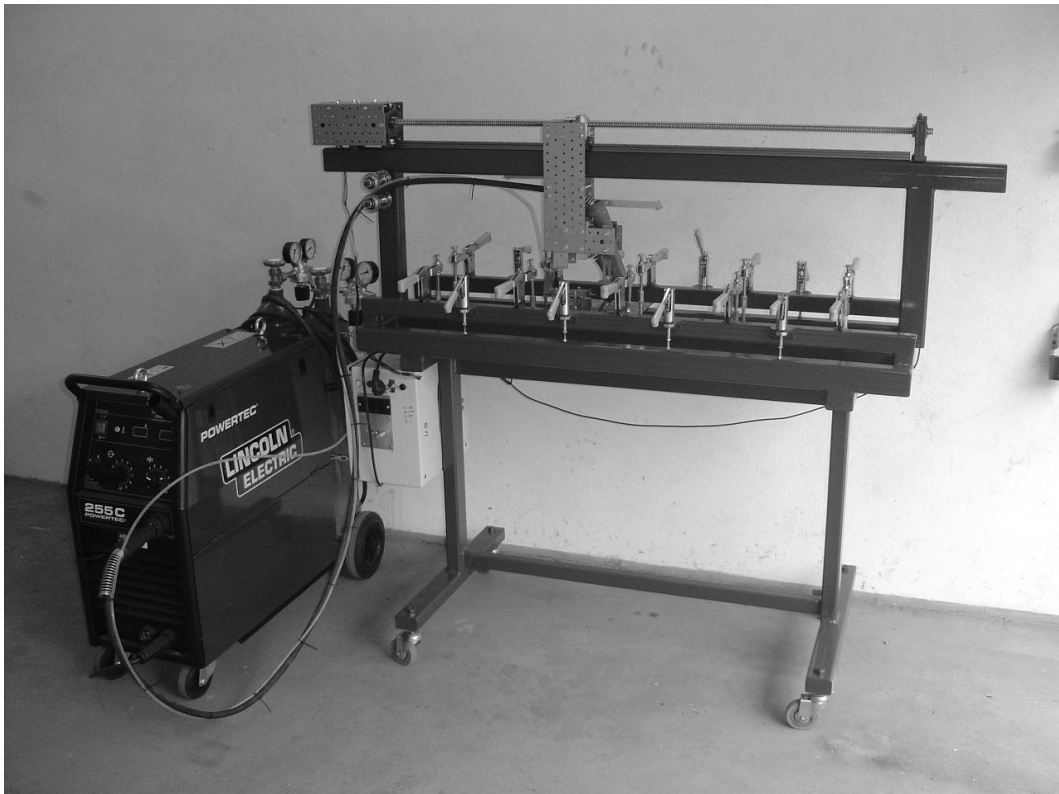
Apparatus for welding with micro-jet injector
